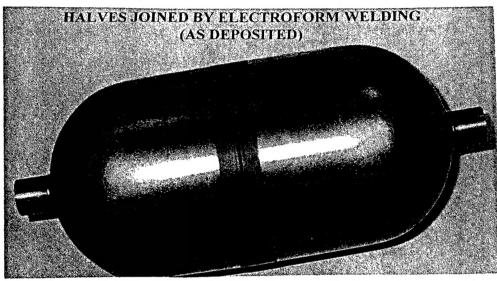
Processing Sequence for Electroformed "Cold Weld" Joining of Tank Components
